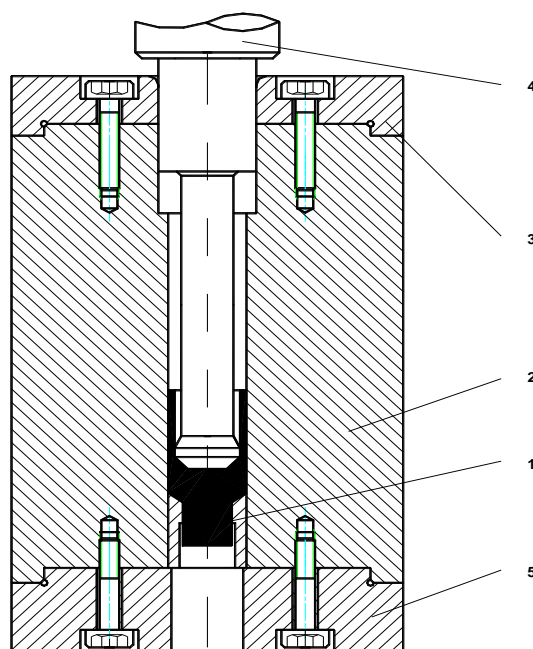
Mold for combined extrusion: 1 - active plate; 2 - body; 3 - upper plate; 4 - punch; 5 - lower plate.
